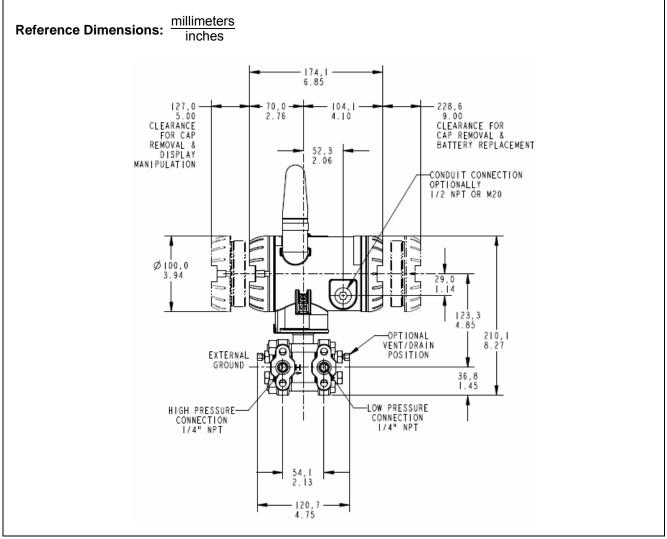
Typical mounting dimensions for STDW924, STDW930 and STDW974 (side view)
